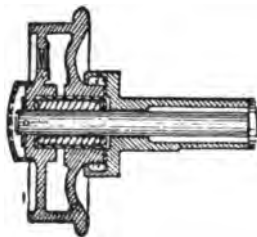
SEC. 10bb.—Wheel with Hyatt roller bearing.
